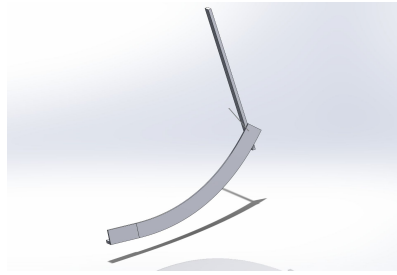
Medial View of Carbon Fiber Support in Solidworks
